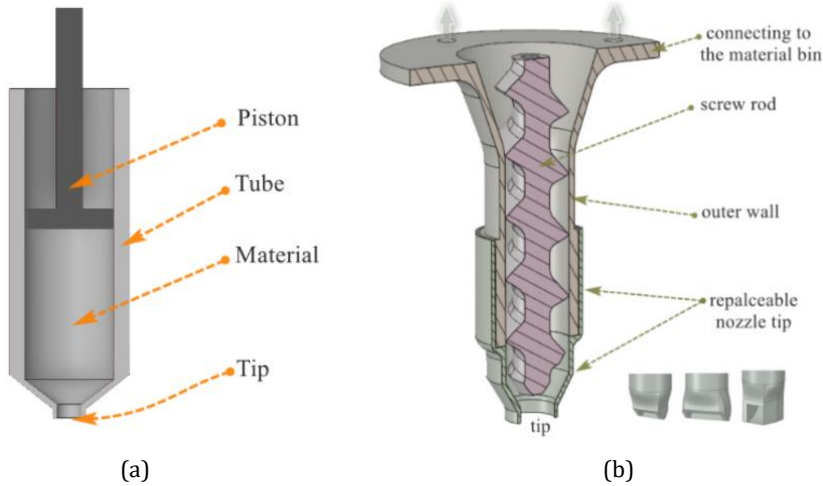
Two commonly used extruder types in 3DCP [45] (a) a piston extruder; (b) a screw-type extruder
